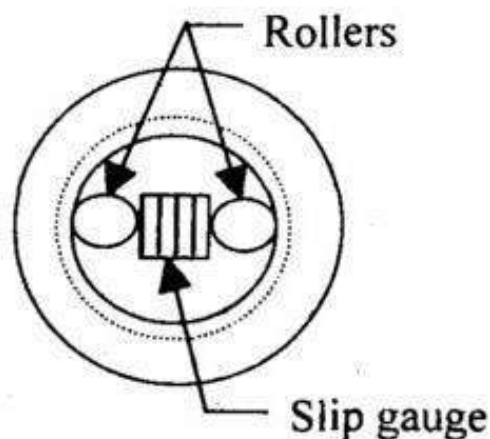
internal tread minor diameter measurement using slip gauges and rollers
